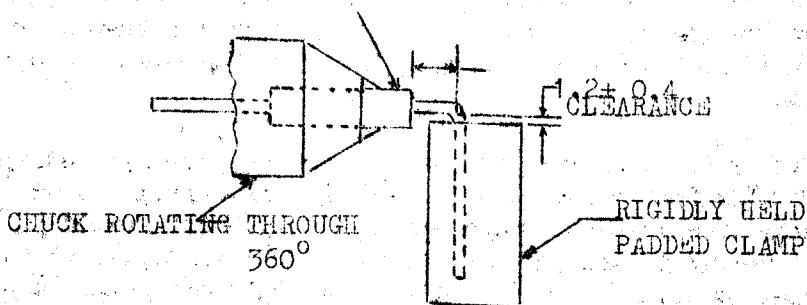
B - Method of Twisting Wire Leads for the Torsion test (All dimension in millimeters)
